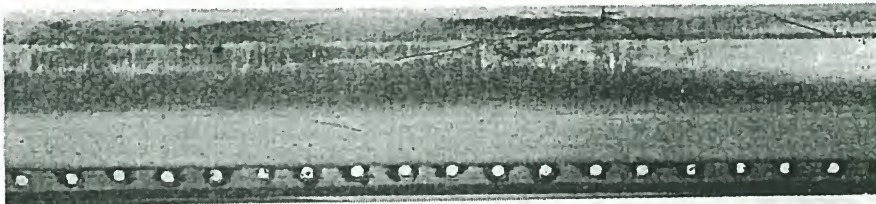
STRESS AND CORROSION CRACKS IN HIGH-TENSILE STEEL SPAR FLANGE
